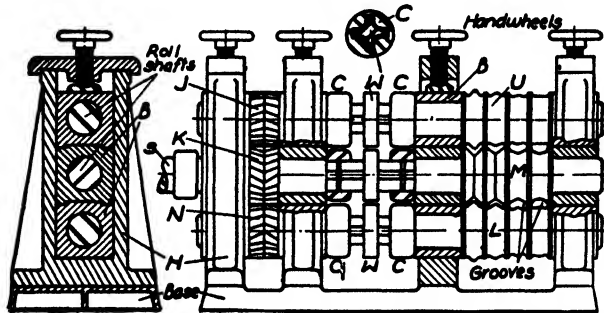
Three-high Multiple-pass Single Stand Rolling Mill.
